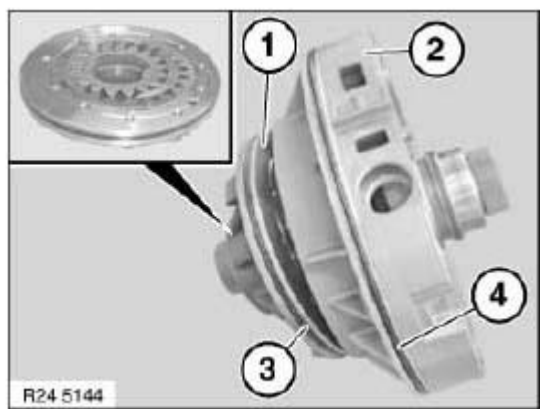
Identifying Cover, O-Rings And Pump Housing
